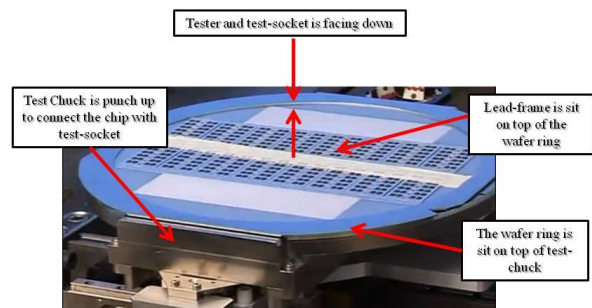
The Test Chuck of the Wafer-Ring Testing Handling.
